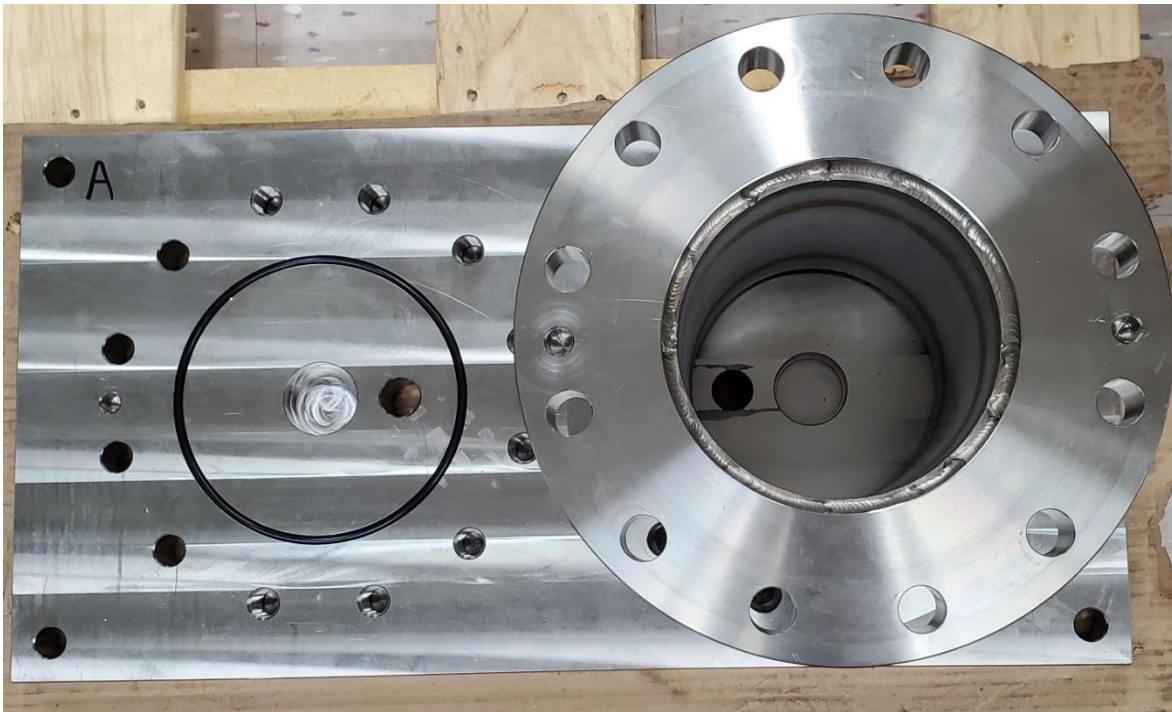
O-Ring and Flanged Pipe Side-By-Side
